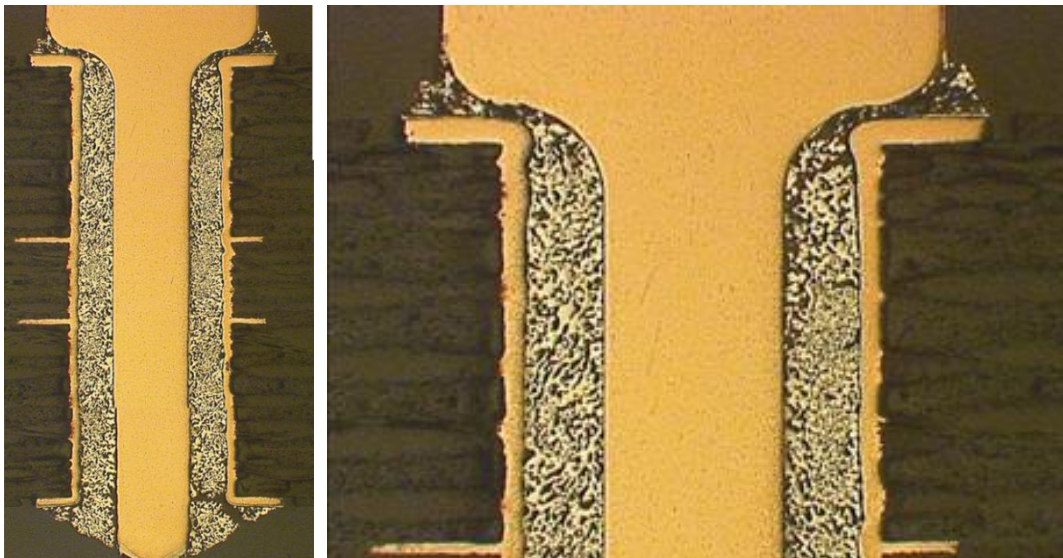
PDIP-20 Solder Joints, Board 124, Component U23, SnPb/NiPdAu, DNF
